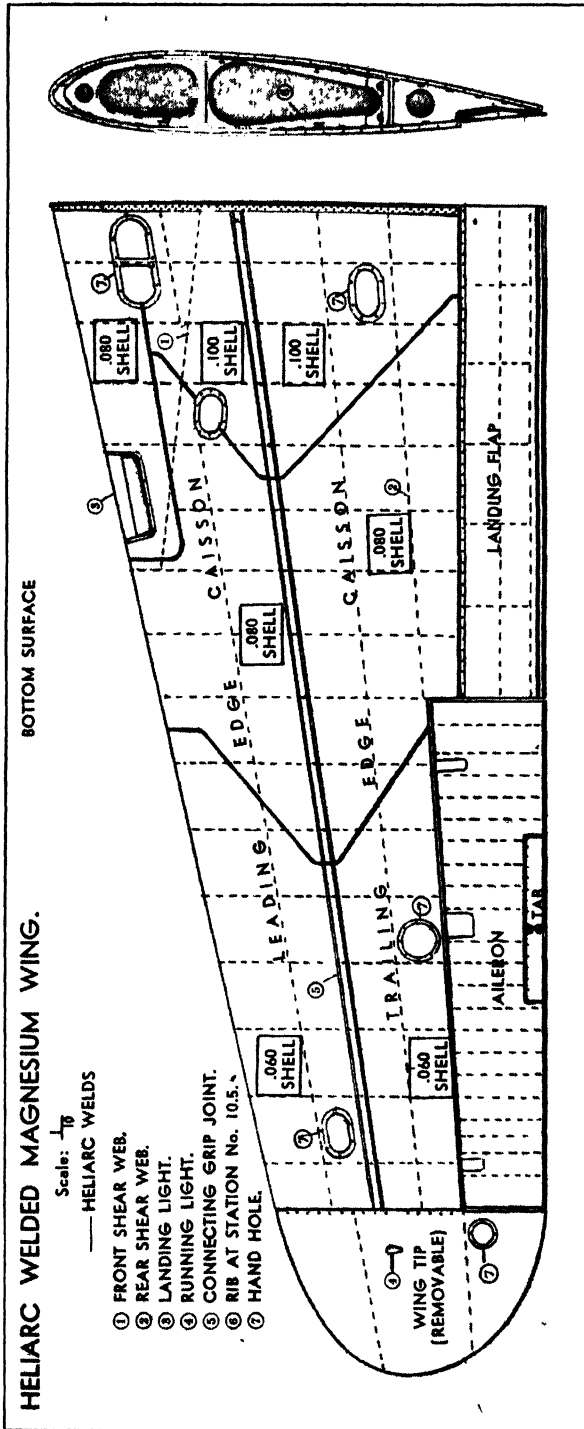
Welded magnesium wing (bottom surface).
